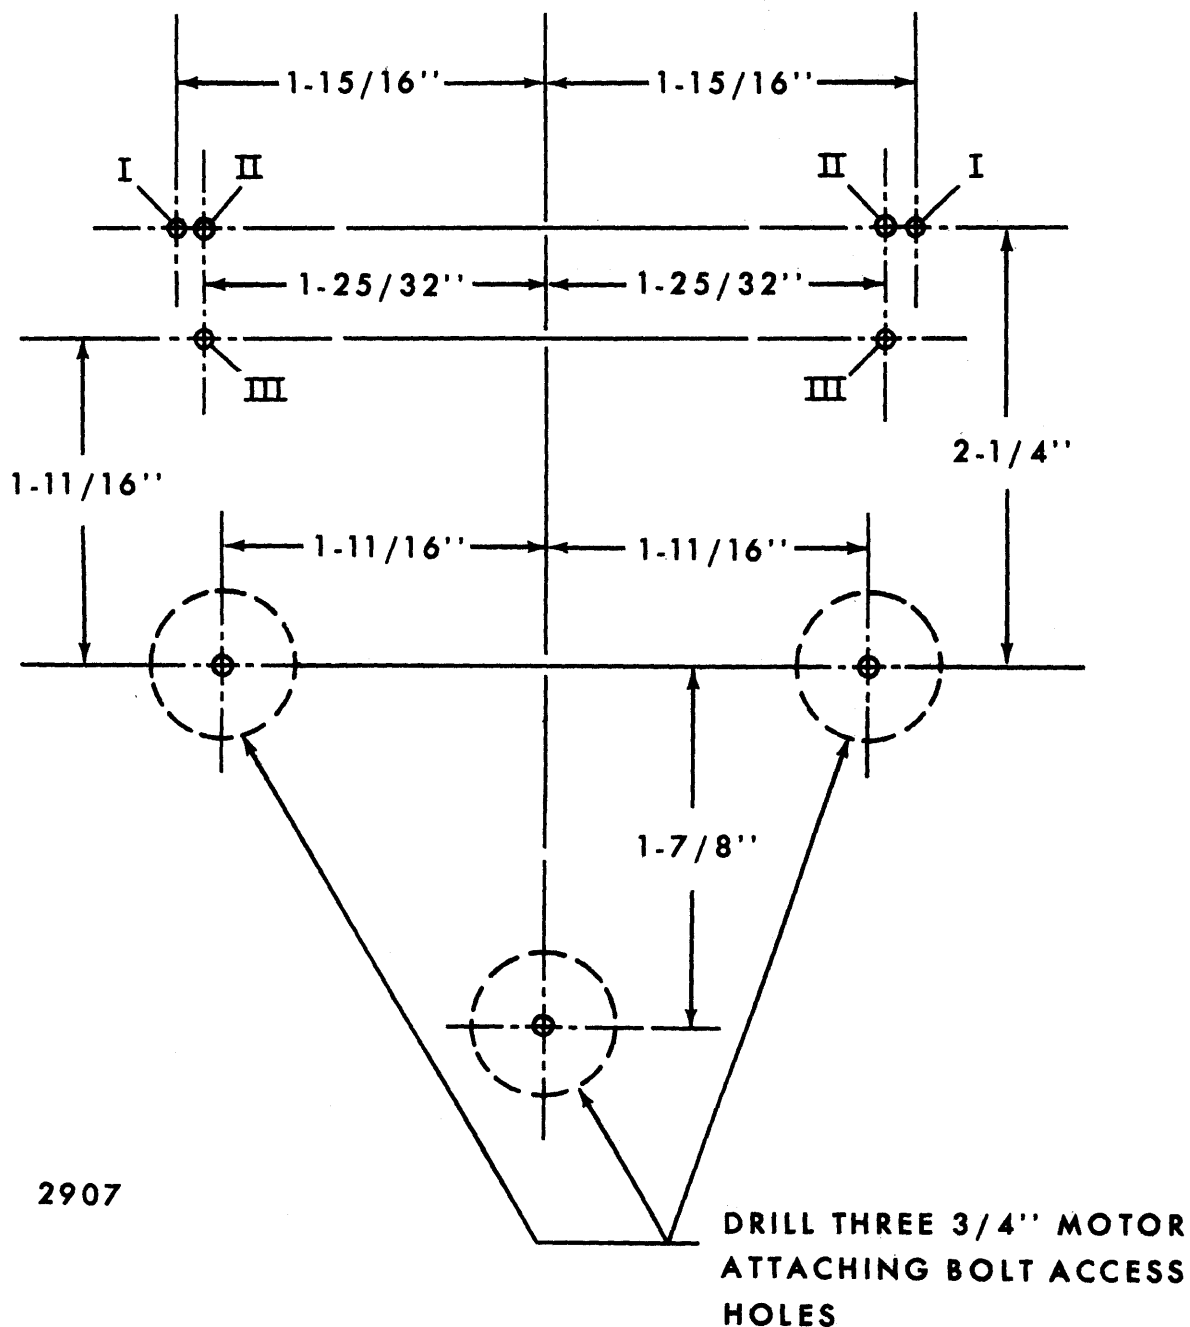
Window Regulator Lower Attaching Bolts Reference Points for Locating Window Motor to Regulator Attaching Bolts:
